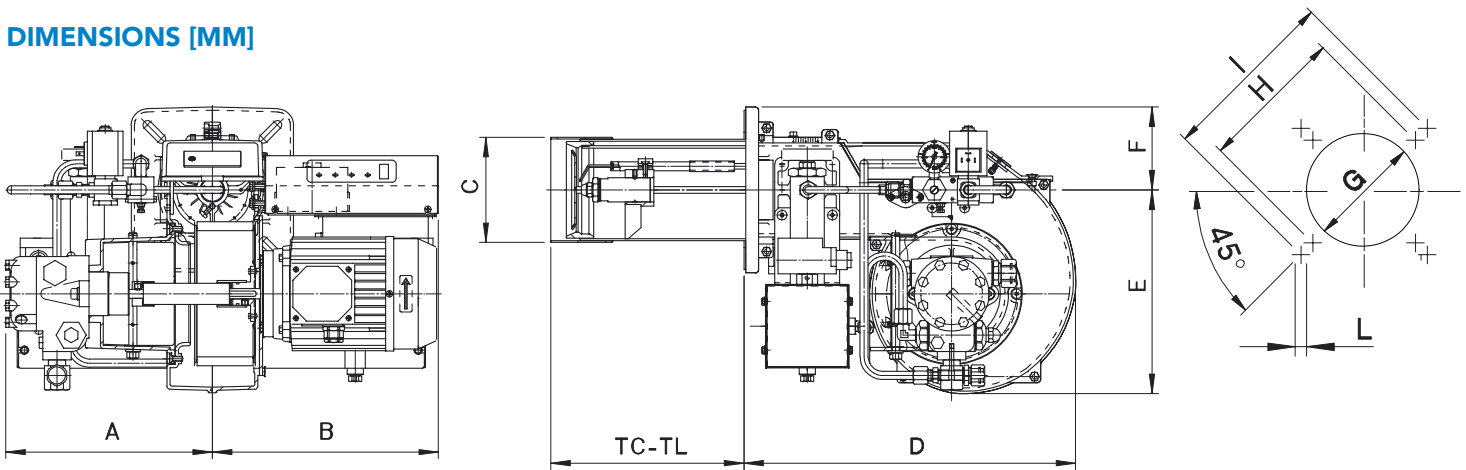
Dimensions FNDL 8 - FNDL 16 - FNDL 25
